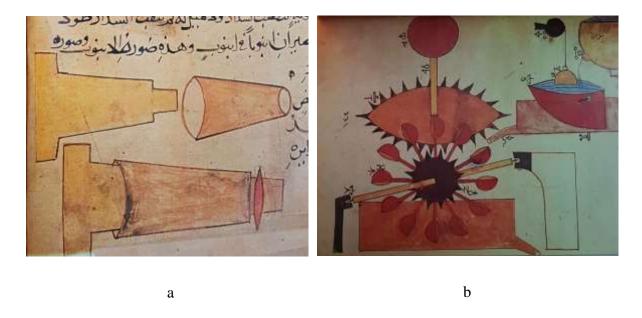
Examples of mechanical devices appear in three-dimensional drawings (Topkapi MS 3742, a: p. 16, b: p. 133)
